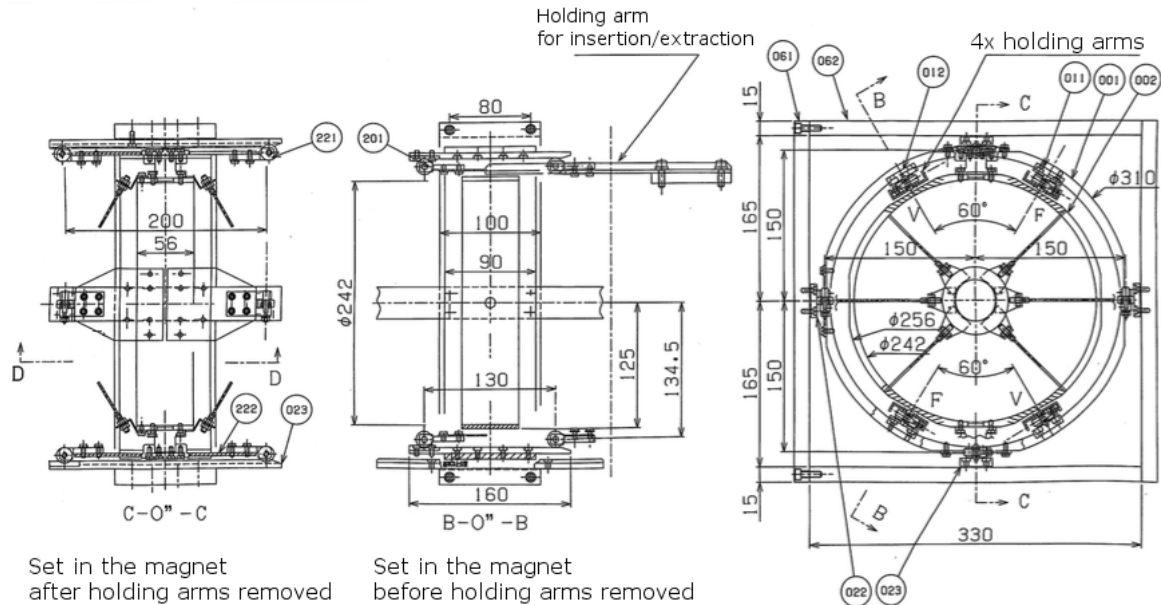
The target holder prototype design with a holding arm insertion. 001: outer supporting ring, 002: inner supporting ring, 011&012: mating components for holding arm latches, 022: supporting rail, 023: V-shaped rail, 061&062: dummy wall of the radiation shield, 201: latch on a holding arm, 221: rhombic wheel, and 222: extension for the rhombic wheel.
